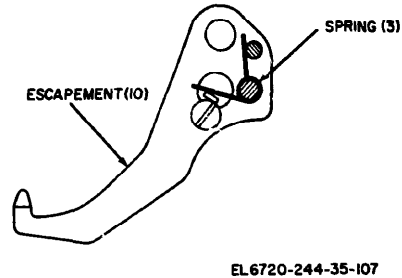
Spring location (spring (3) from fig. 3-12).
